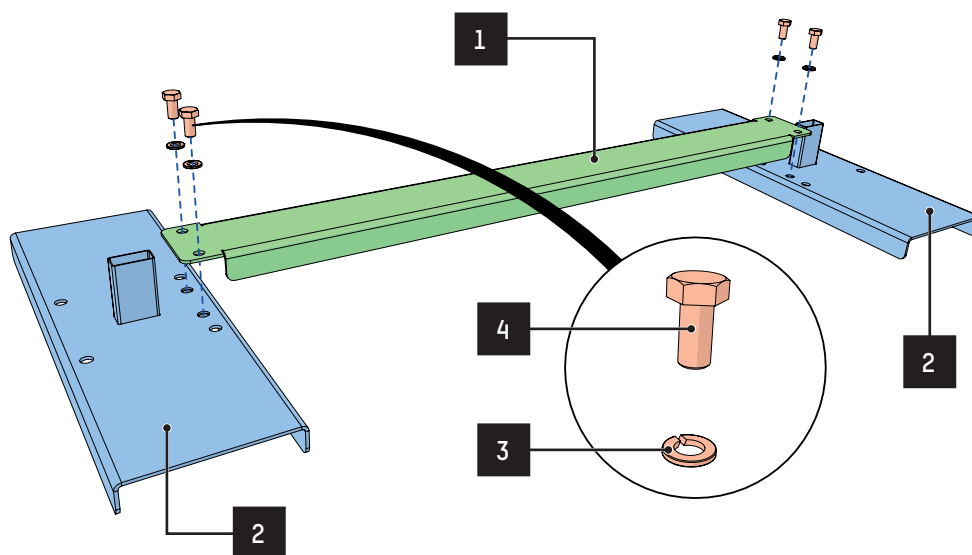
Assembling the Fixing Frame (GBR-E-0013108)
